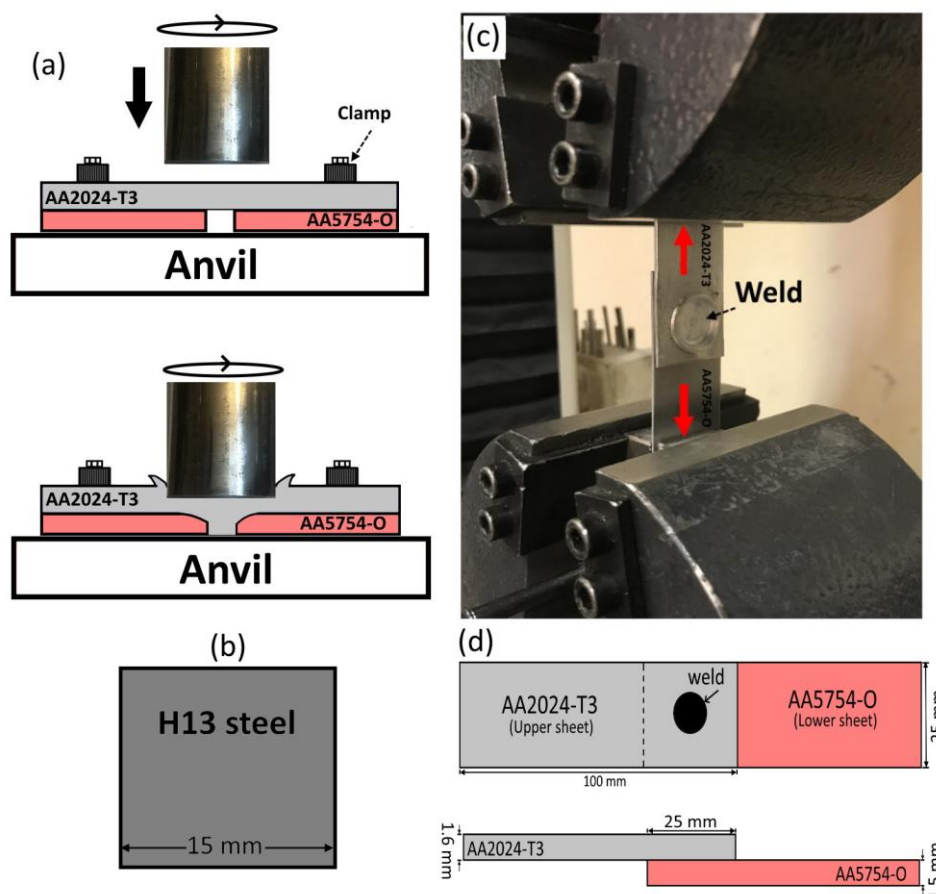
Schematic of the (a) friction stir extrusion welding process, (b) tool used during process, (c) tensile testing, (d) tensile/shear samples.
